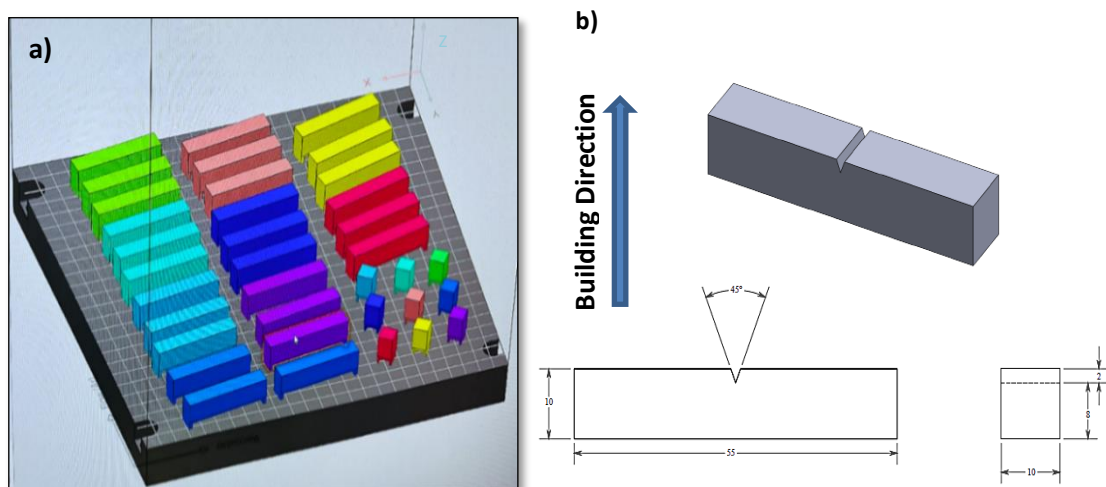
Design and layout of the charpy test specimens: (a) CAD layout of the specimens in the build chamber for the LPBF process; (b) Geometric details of the impact test specimen with notch dimensions.
